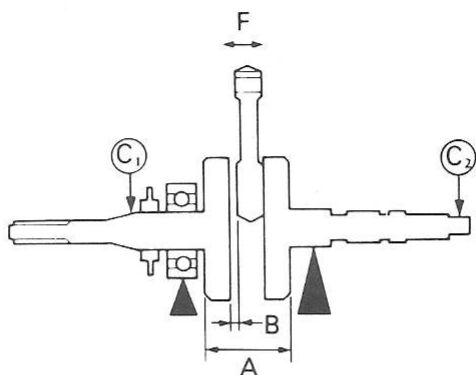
B.50 Crankshaft inspection details (Sec 28)
